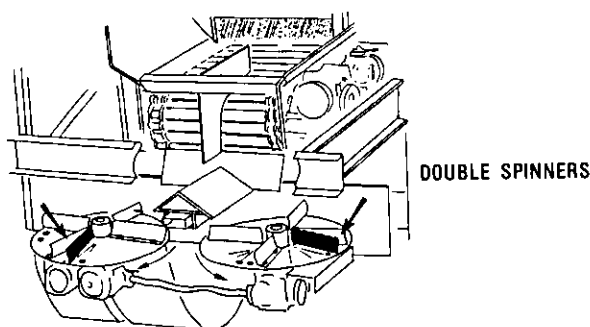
Spinner blade adjustment on a double-spinner spreader.
